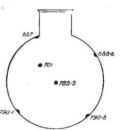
Gold 75 parts, lead 15 parts, zinc 10 parts; weight about two kilograms.
